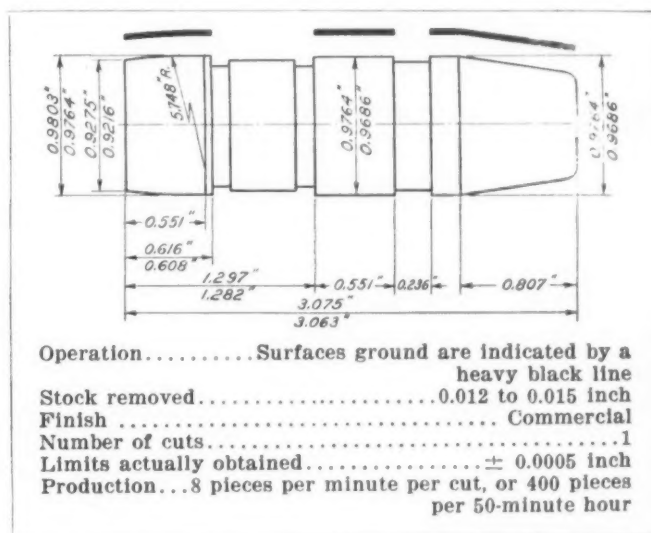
View of 25-millimeter Shell and Centerless Grinding Production Data
